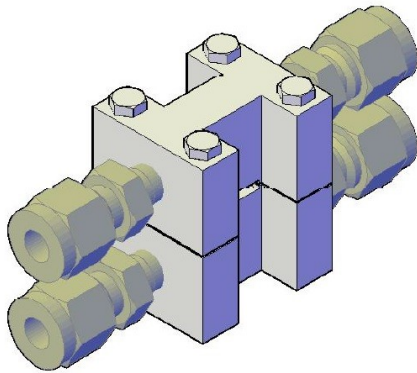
AutoCAD drawing of the custom made laser crystal holder.
